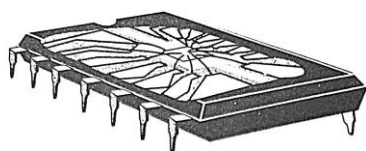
Cutaway view of a dual-in-line 14-pin package
